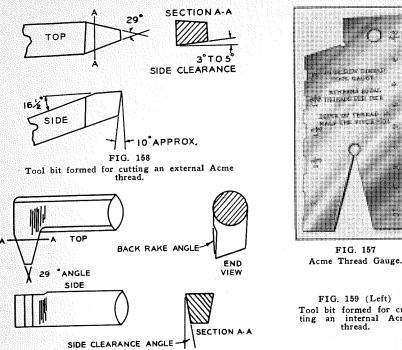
and 159 show the proper tool forms for cutting external and internal Acme threads. The forms must be checked with the Acme thread gauge (Fig. 157) during the grinding process.
